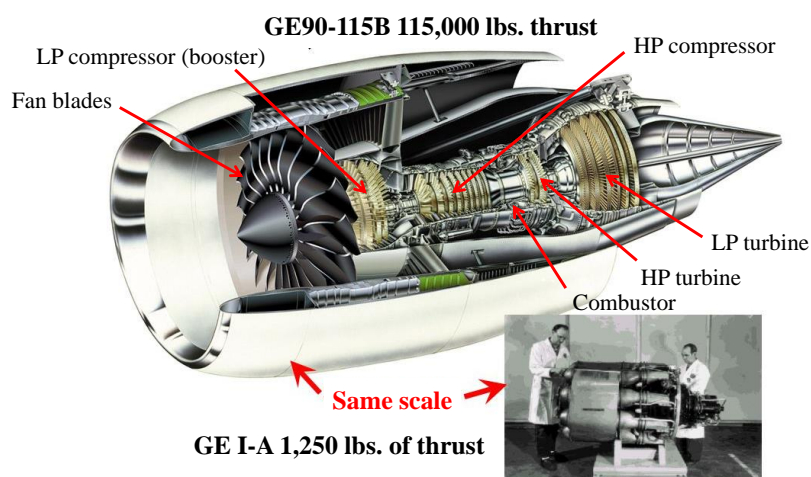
Component of a gas turbine engine (Turbo fan GE90-115B) [1].
